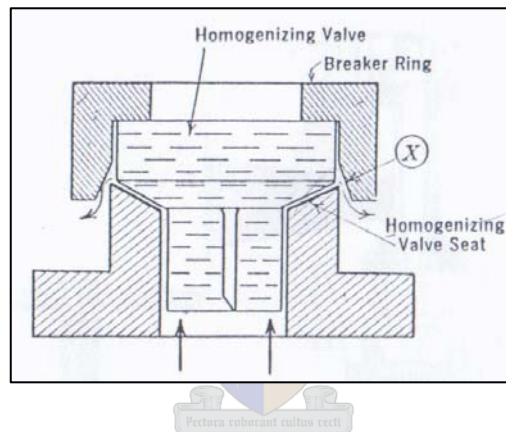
Cross section of a homogenising valve equipped with a breaker ring.
